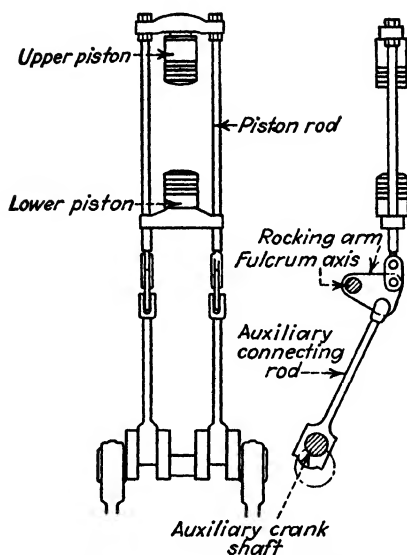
Exhaust-valve gear. Burmeister and Wain double-acting engine. (British Motor Ship.)
